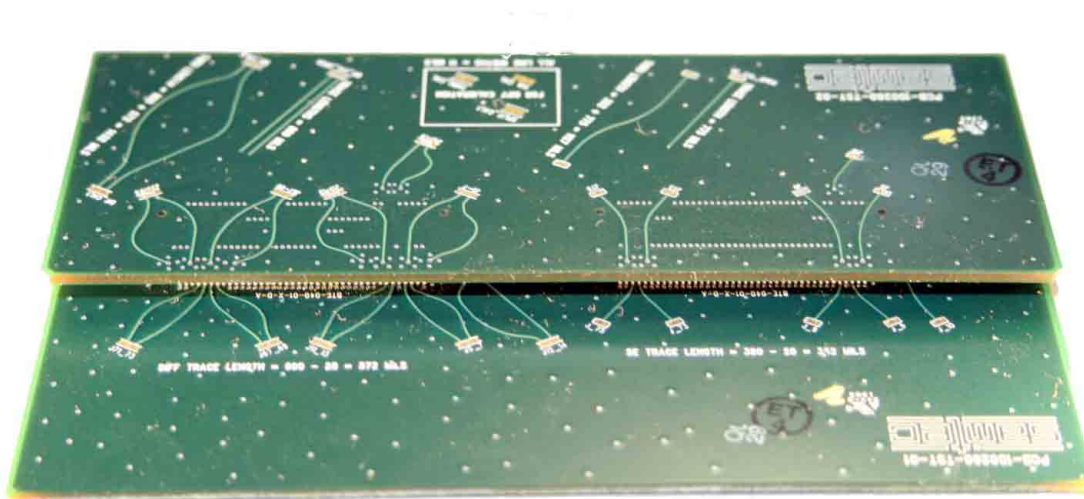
Mated PCB Test Fixture with Mounted Test Connectors
